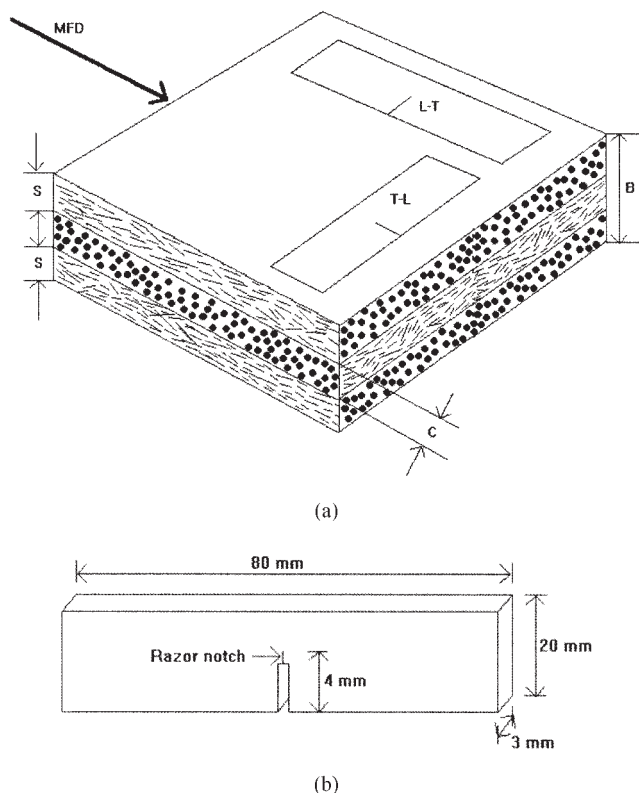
(a) Machining of the SEN-B test specimens used. (b) Designation of the SEN-B test specimens used.
